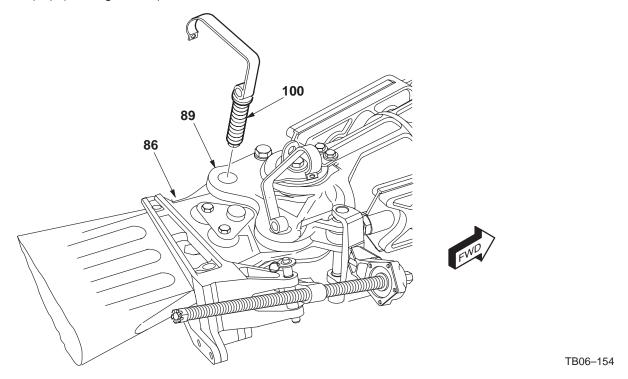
Install Aircraft Blade Pin in Trailing Edge Lead Lag Link and Blade Root Fitting
